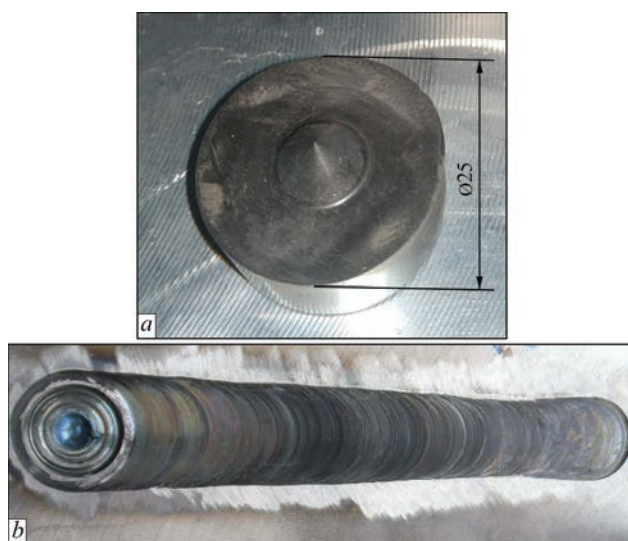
General view of the tool from polycrystalline boron nitride for welding stainless steels (a) and general view of the weld in AISI 304 steel welding (b)
